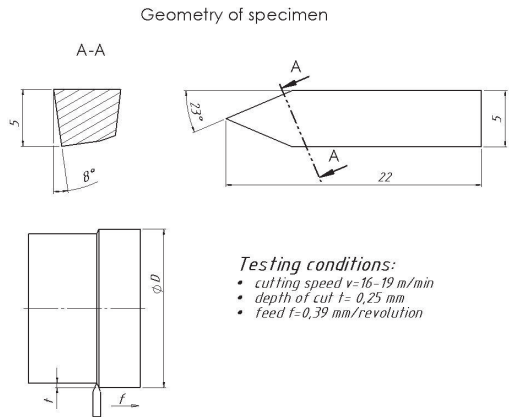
The adhesive wear testing conditions and geometry of specimen
